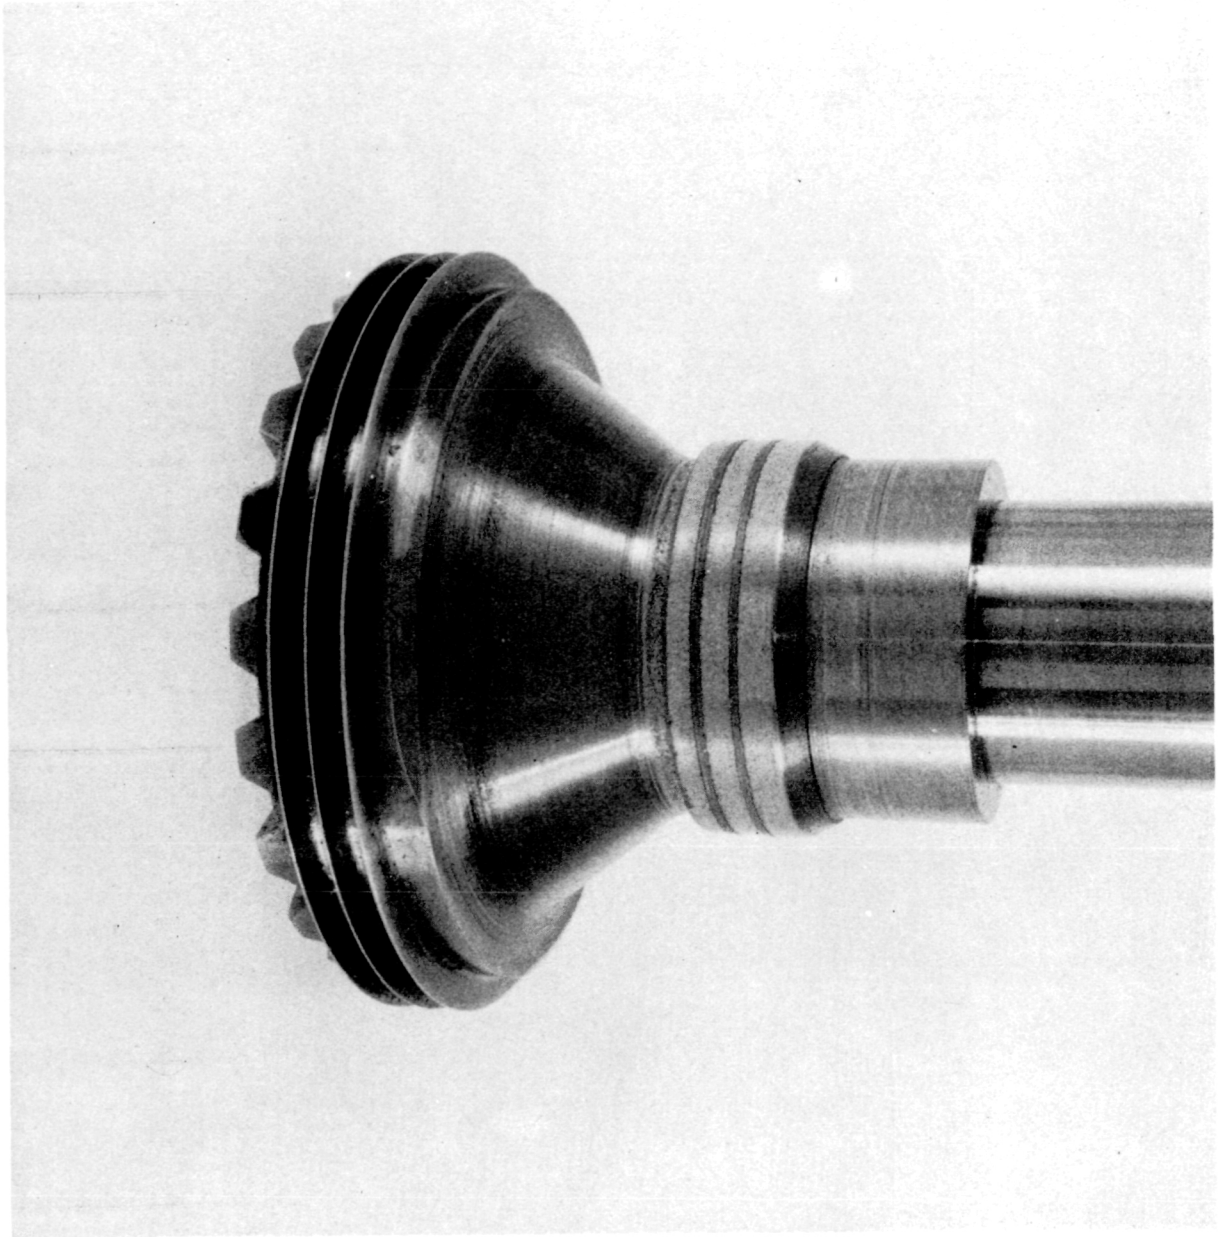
NASA 6:1 Compressor Test Rig, Inducer Failure, Turbine Shaft Seal Rub SKP25641-1.
